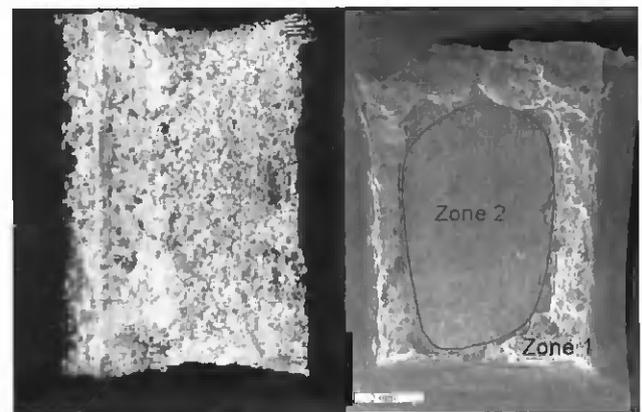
A — The fracture surface of a tensile tested transverse weld specimen in AA6060 aluminum alloy (by stereo microscope). B — The fracture surface (by SEM) of a Charpy-tested specimen of the same transverse weld at the same position along the extruded length
